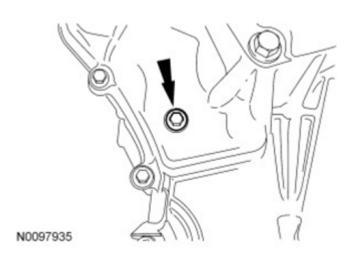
Locating Upper Front Cover Timing Hole Plug Courtesy of FORD MOTOR CO.
